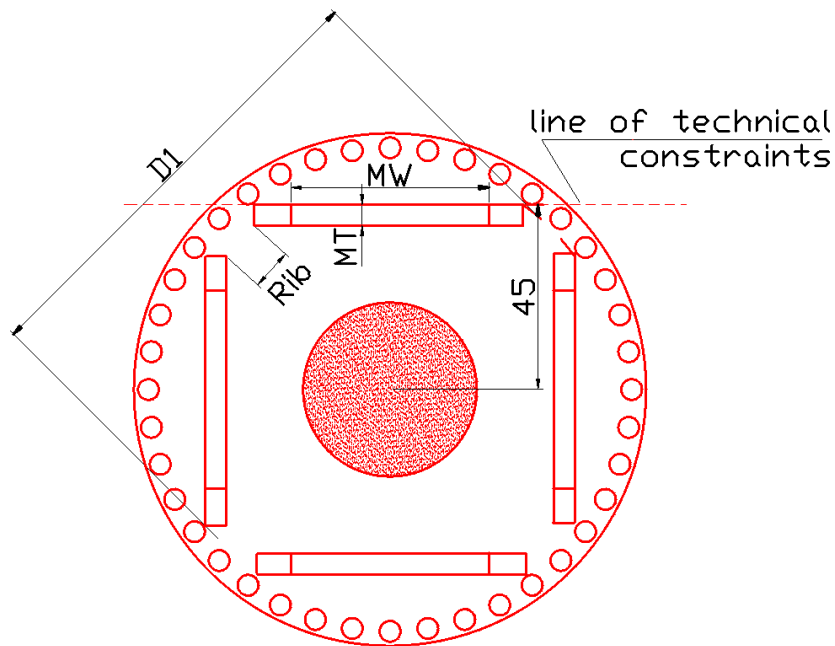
2 Rotor with series magnetic circuit structure under technical constraints imposed by manufacturer
